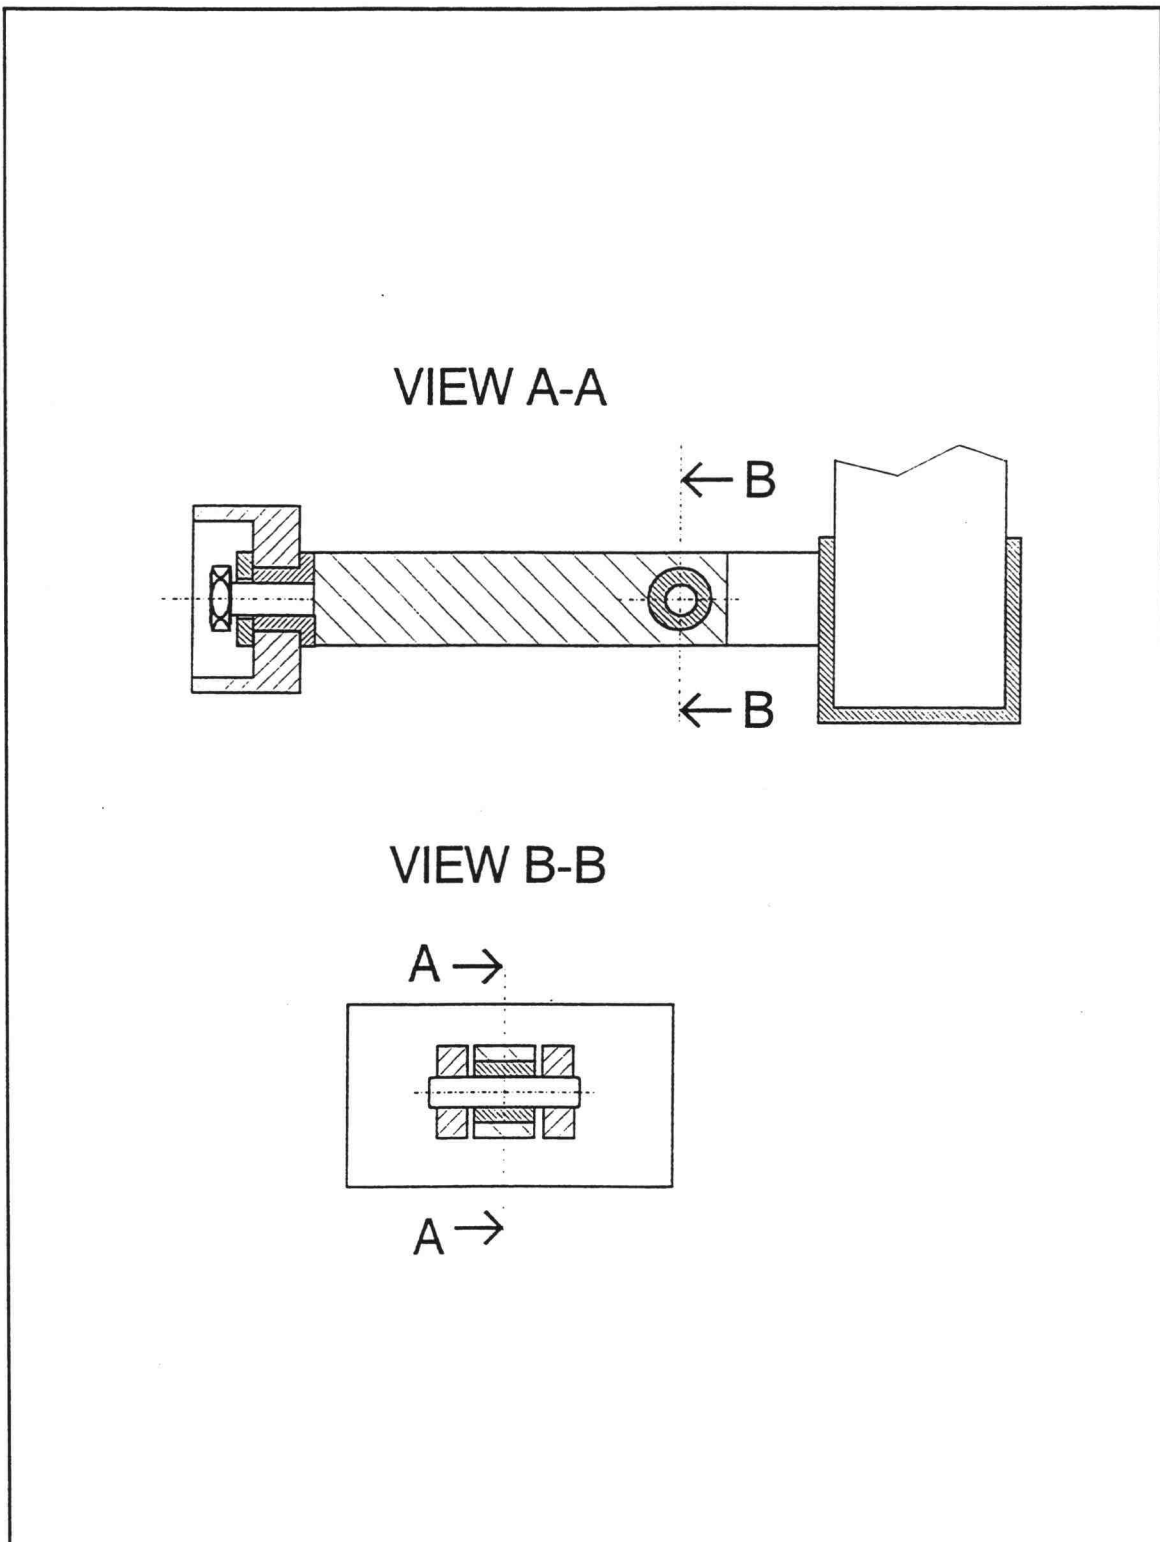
Drawing 5: Alternative 1 View A-A and B-B
